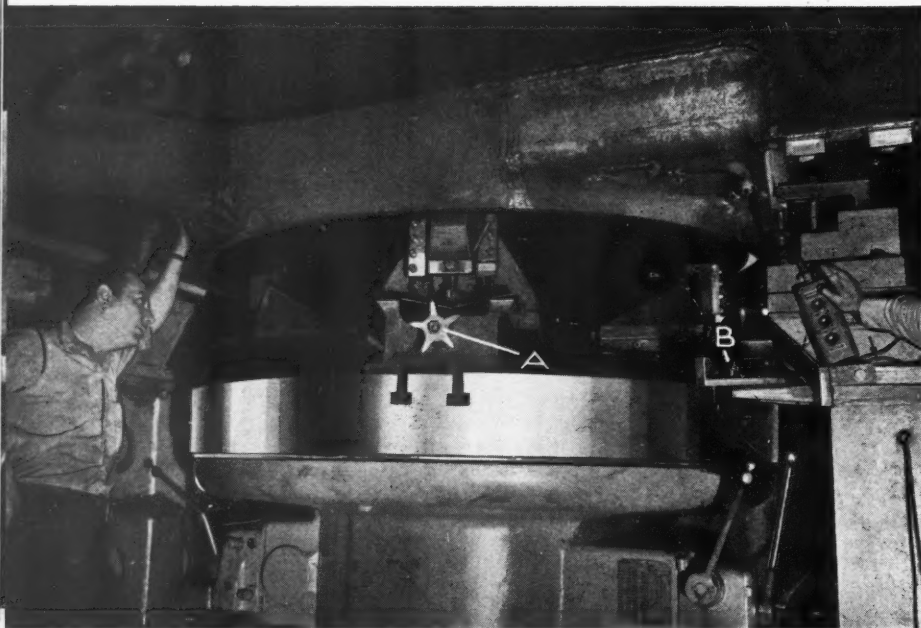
A unique set-up in which boring and facing heads are mounted on the revolving table of a horizontal boring mill for machining the turret ring. Star-wheel feeds are employed
